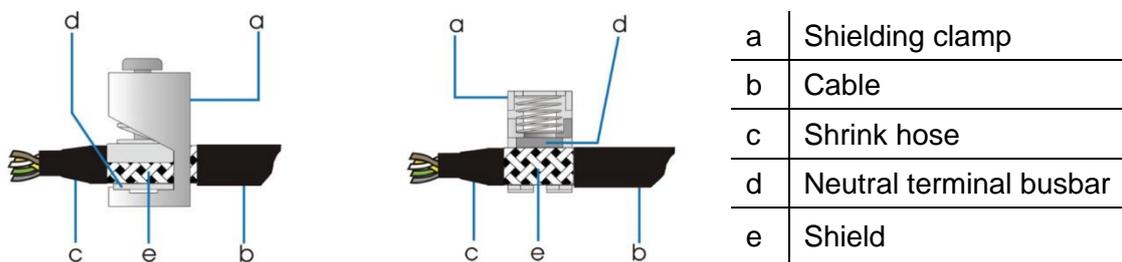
Left: Shield over cable, hand-fasten shield securing clip
